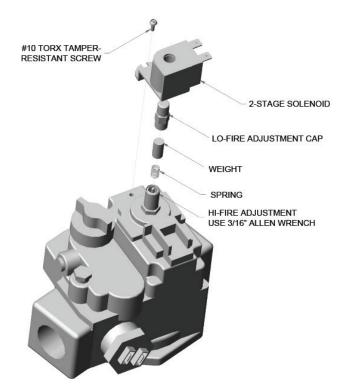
2-Stage Gas Valve Adjustment (Invensys)
